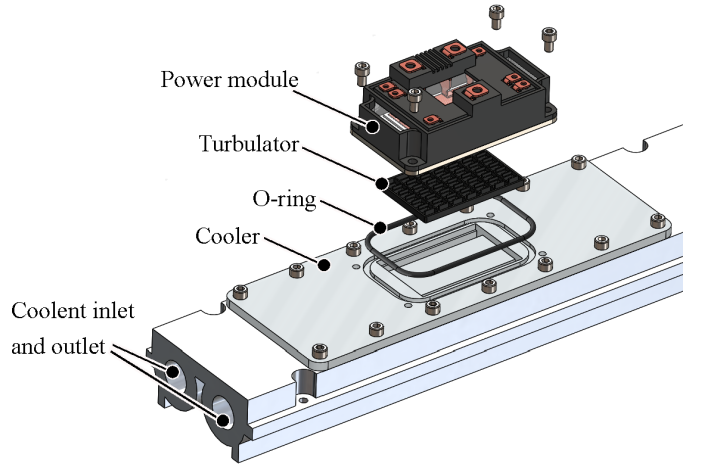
3D CAD model of the half bridge 10 kV SiC MOSFET power module and cooler assembly.
